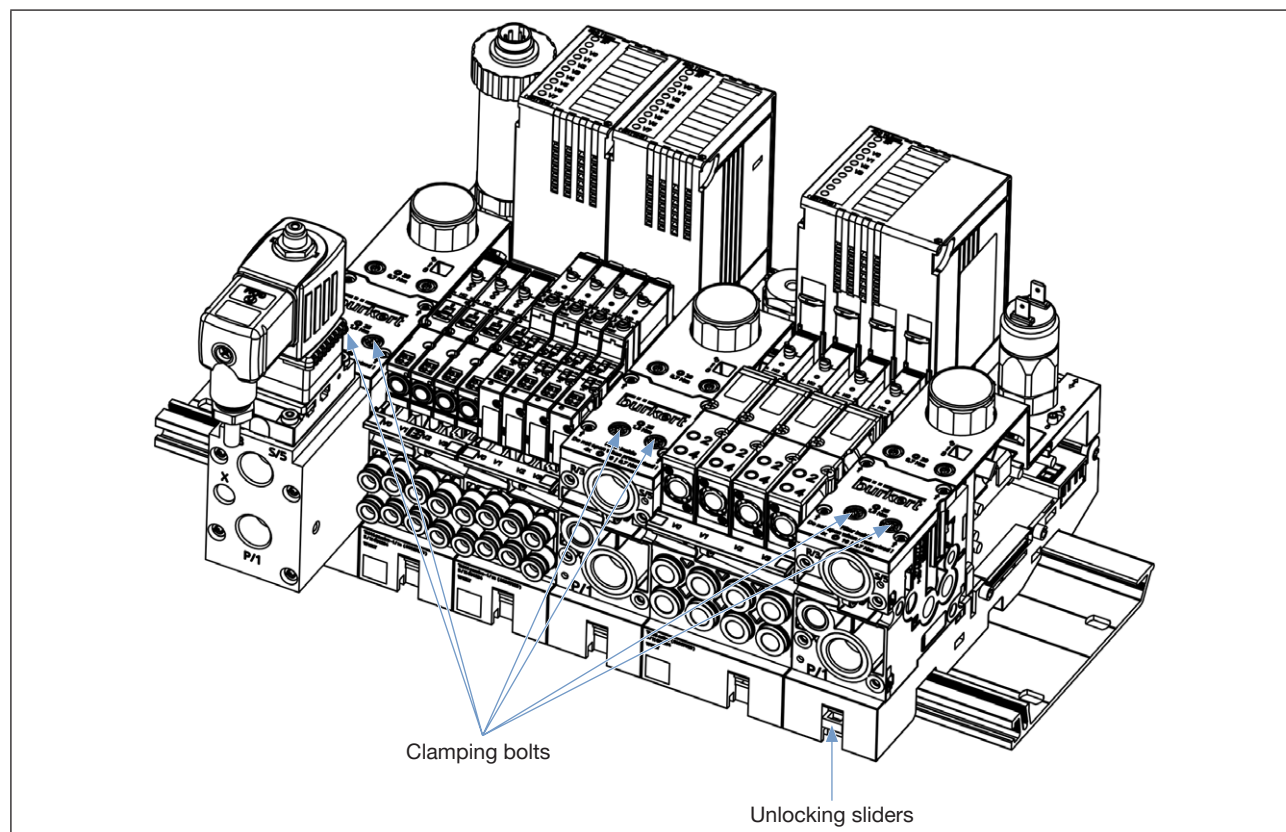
Clamping bolts, unlocking sliders; means for operating the unlocking slider
